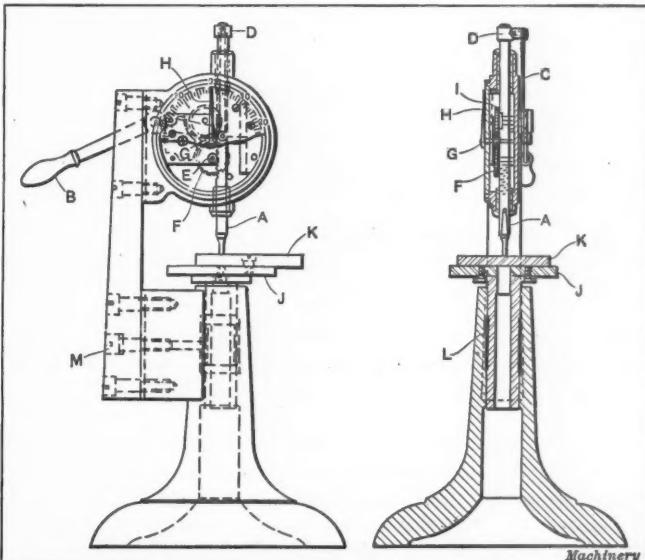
Sectional View showing Construction of Dial Indicator operated by Gears
